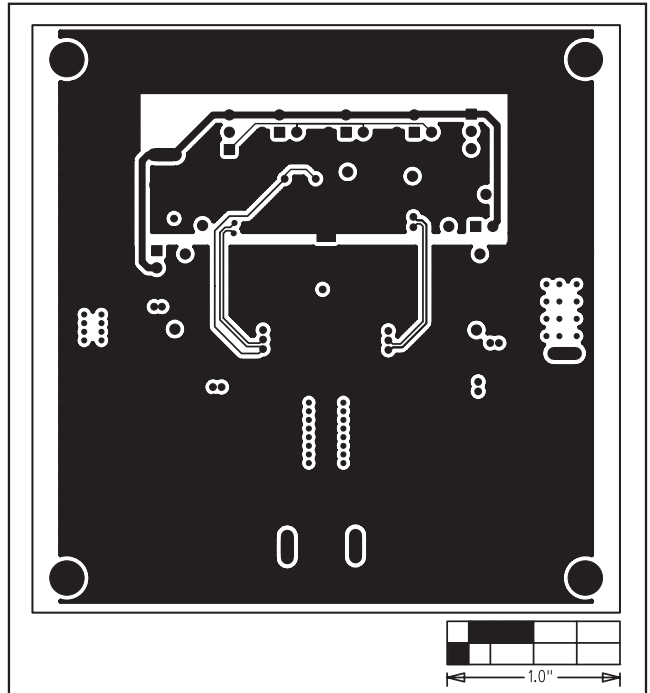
MAX17007 EV Kit PCB Layout—GND Layer 3
